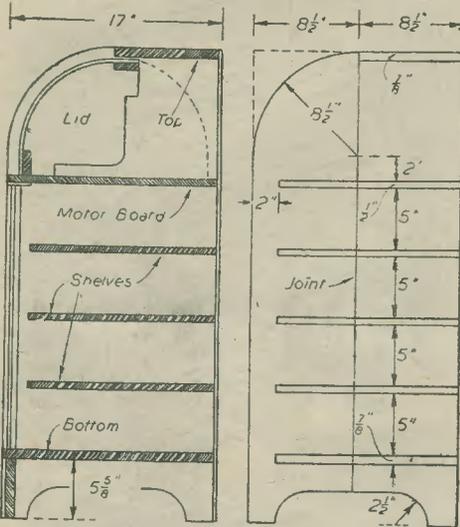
Sectional side view, with shape and size of one side, showing the position of the grooves or trenching for shelves, etc.
